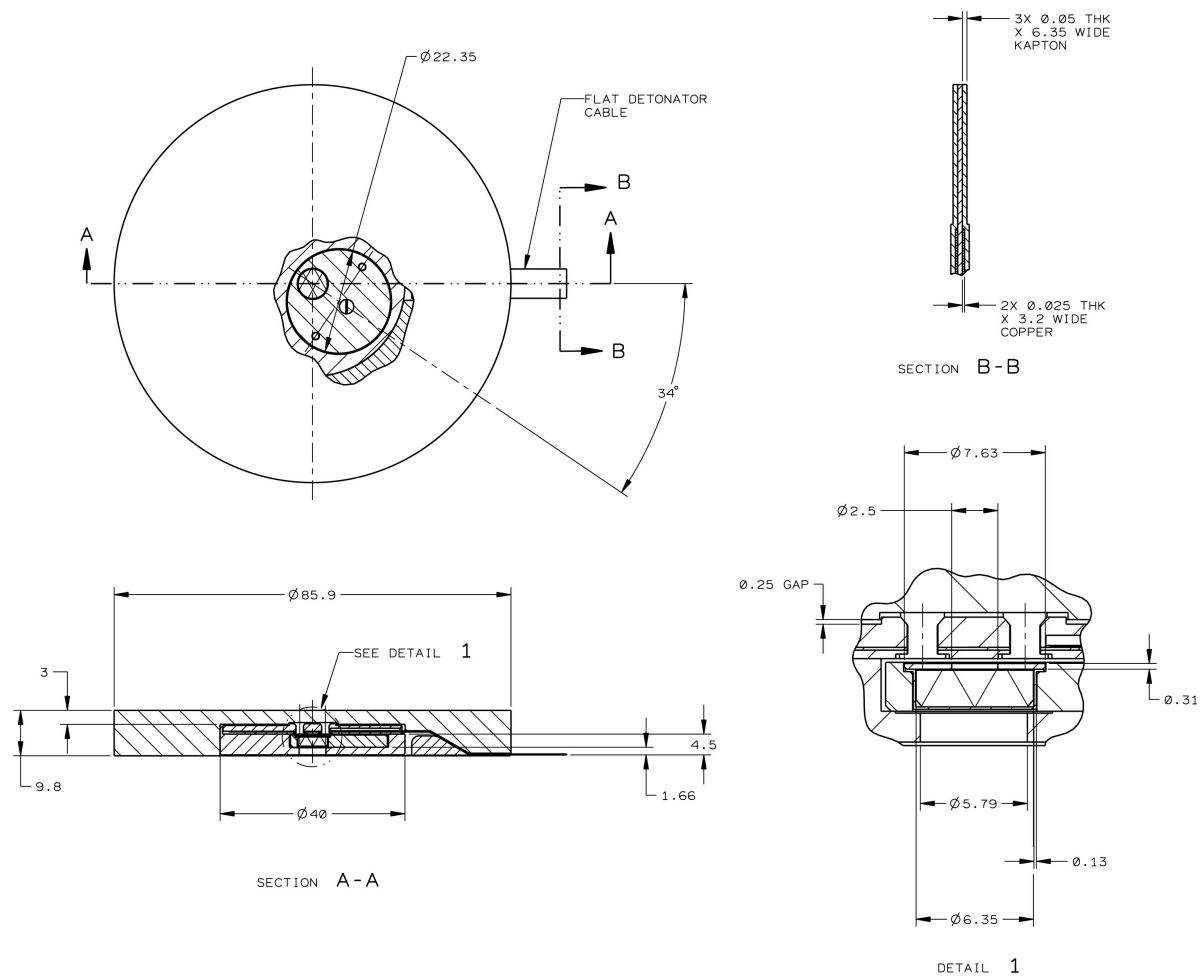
2021E PT5 & PT6 Shadowplate: Full Assembly Top View and Cross Section
